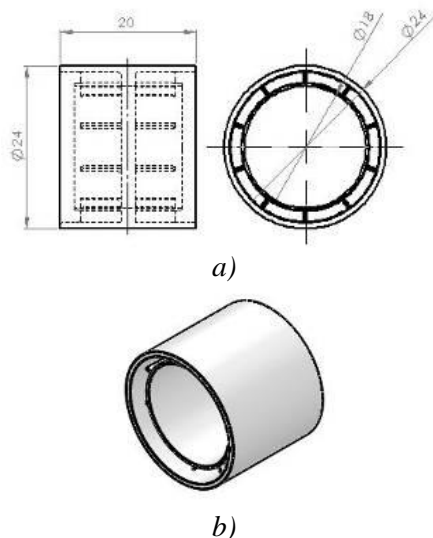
The bushing type piece drawing, a) 2D Model, b) 3D Model
